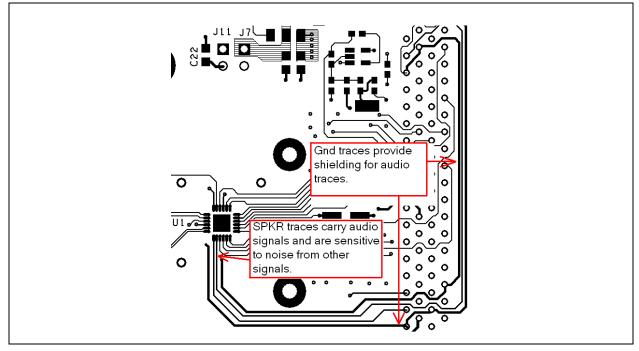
Example of Routing SPKR Traces from QFN Package
